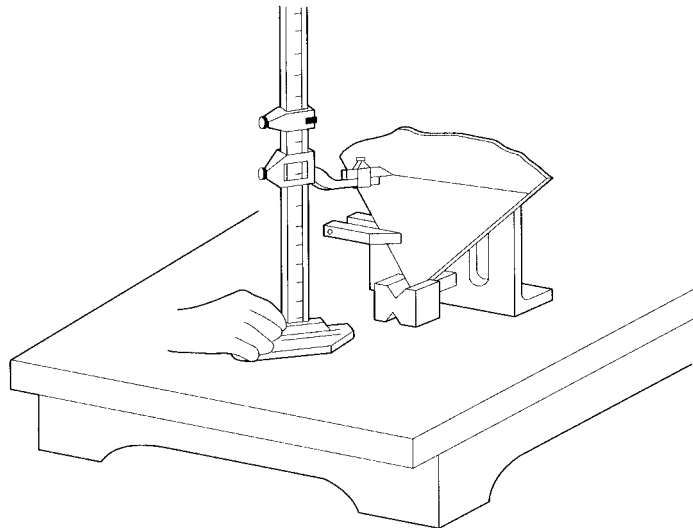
Use of a vernier height gauge to scribe a line parallel to a datum surface
